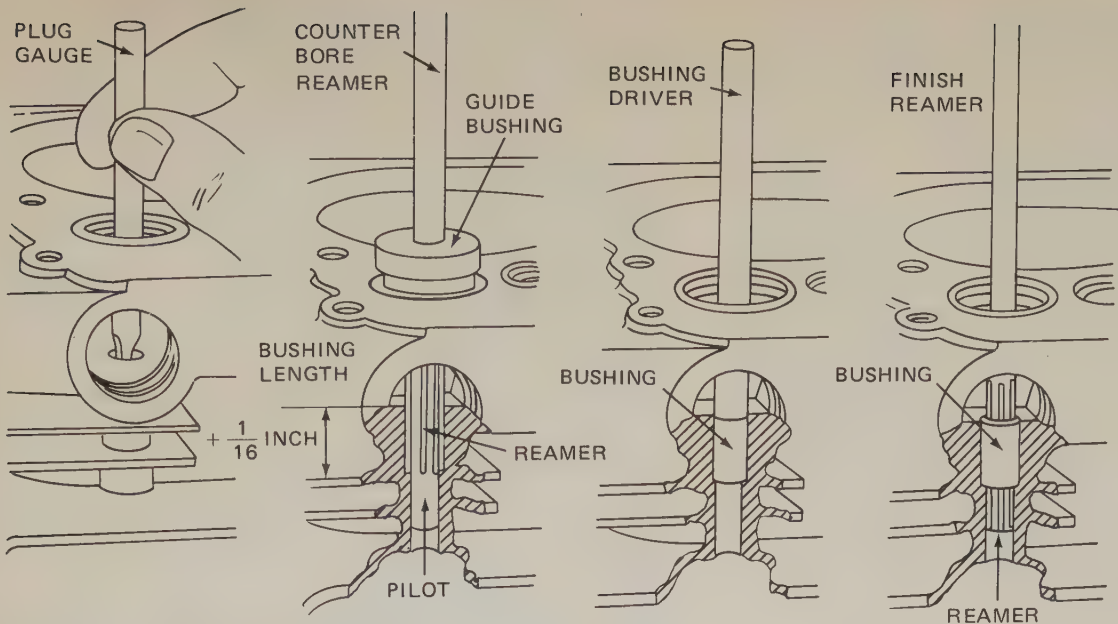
Checking, installing, and reaming valve guides. (Briggs & Stratton Corporation)
